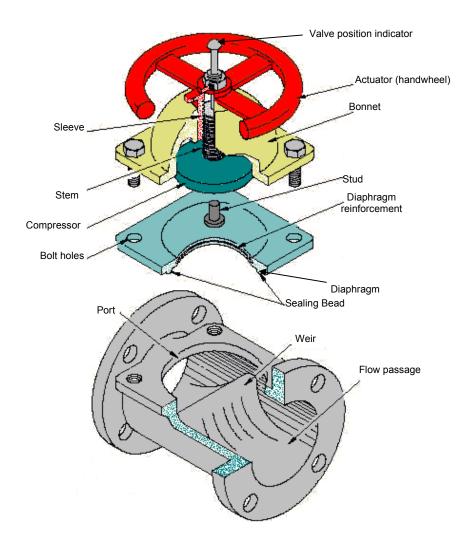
Exploded View of Diaphragm Valve with Weir
